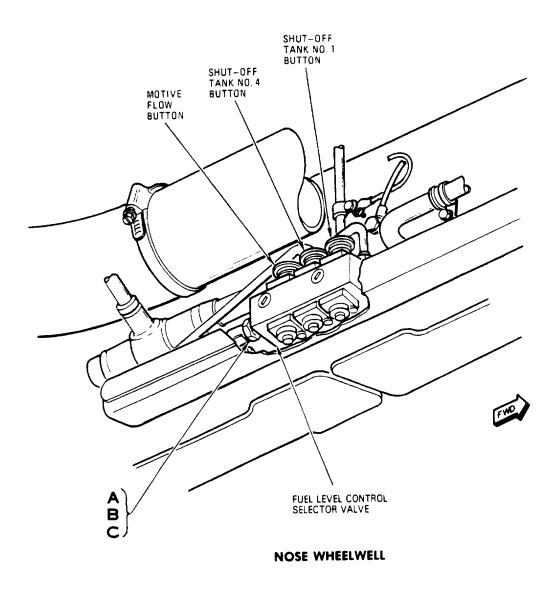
Fuel Level Control Selector Valve Hookup (Sheet 1 of 3)
